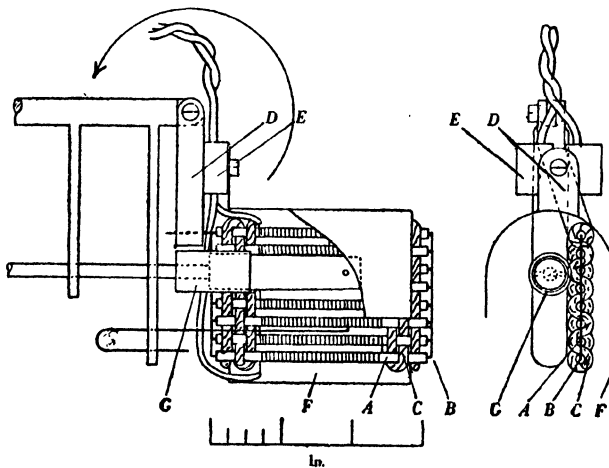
Improved apparatus for winding and mounting glass spirals for sensitive pressure gauges.
